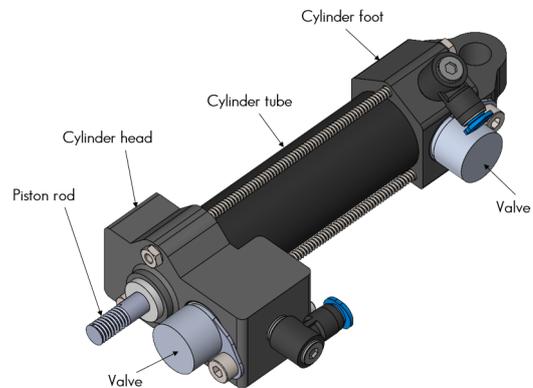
CAD view of the designed 3D-printed pneumatic cylinder with annotation of the main components
